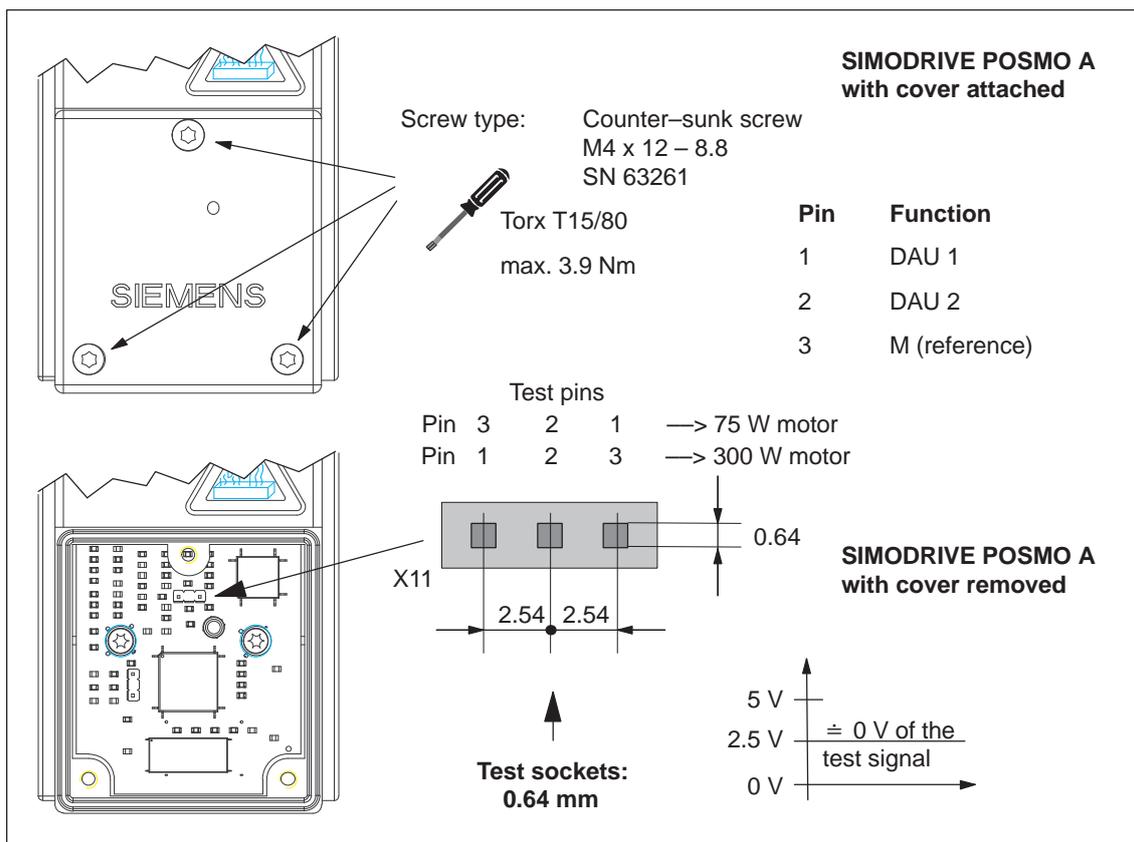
SIMODRIVE POSMO A test sockets with the cover removed
